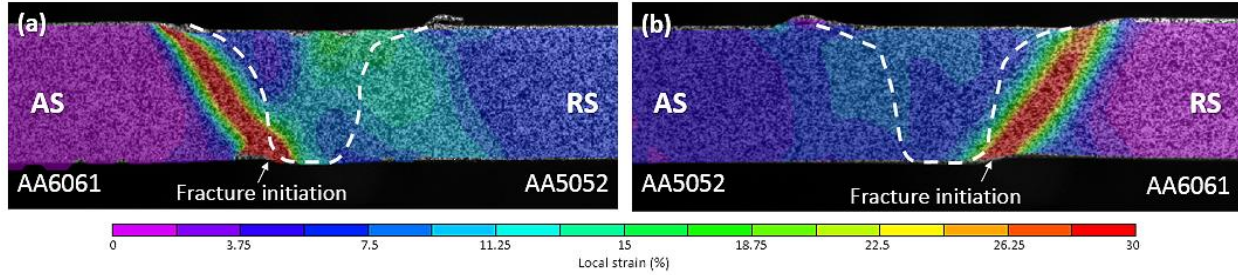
DIC images of (a) A6R5-0.4 and (b) A5R6-0.4 right before fracture. Fracture occurred in HAZ of AA6061 side.
